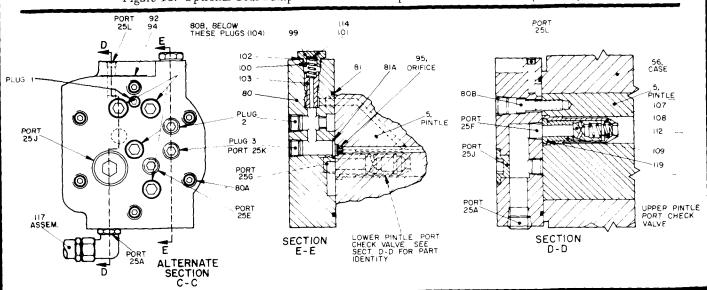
Pintle Cover, Pintle Cover Relief Valve and Check Valves. (508644)
